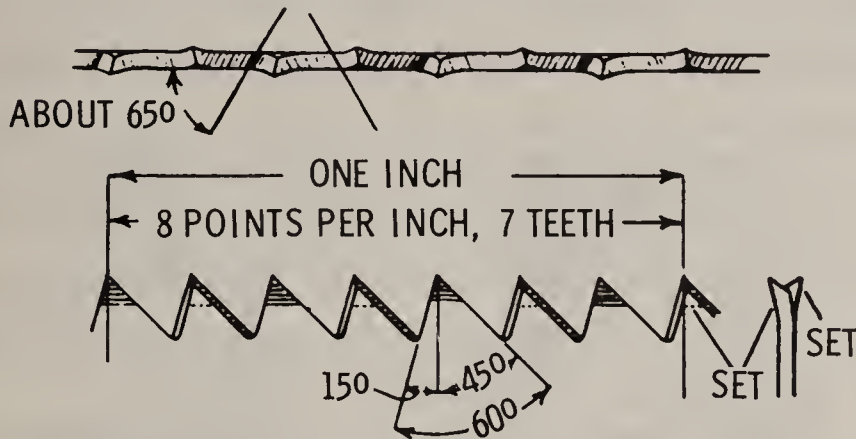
Side view and tooth-edge view of typical crosscut saw. The crosscut saw is used for cutting across the grain and has a different cutting action than that of the rip saw. The teeth cut like sharp pointed knives. They are also made with more points to the inch than the rip saw. The crosscut saw cuts on both forward and backward strokes. The upper half of each tooth is set, alternately, one to the right, the next to the left to assure clearance.
